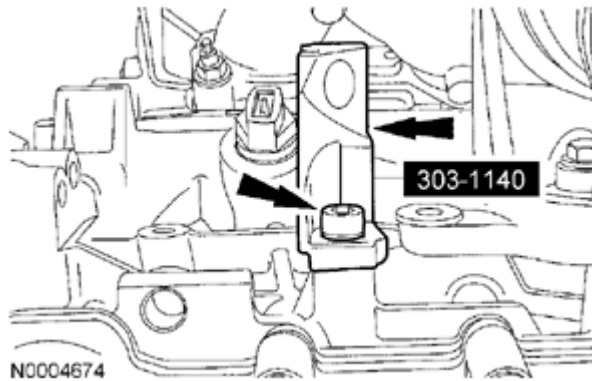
Locating Lower Half Of Engine Lifting Bracket Set
